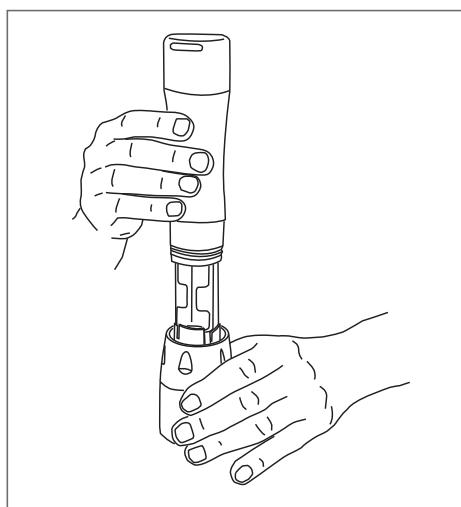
Insertion of the battery casing in the reflector-glass group (torch head)
